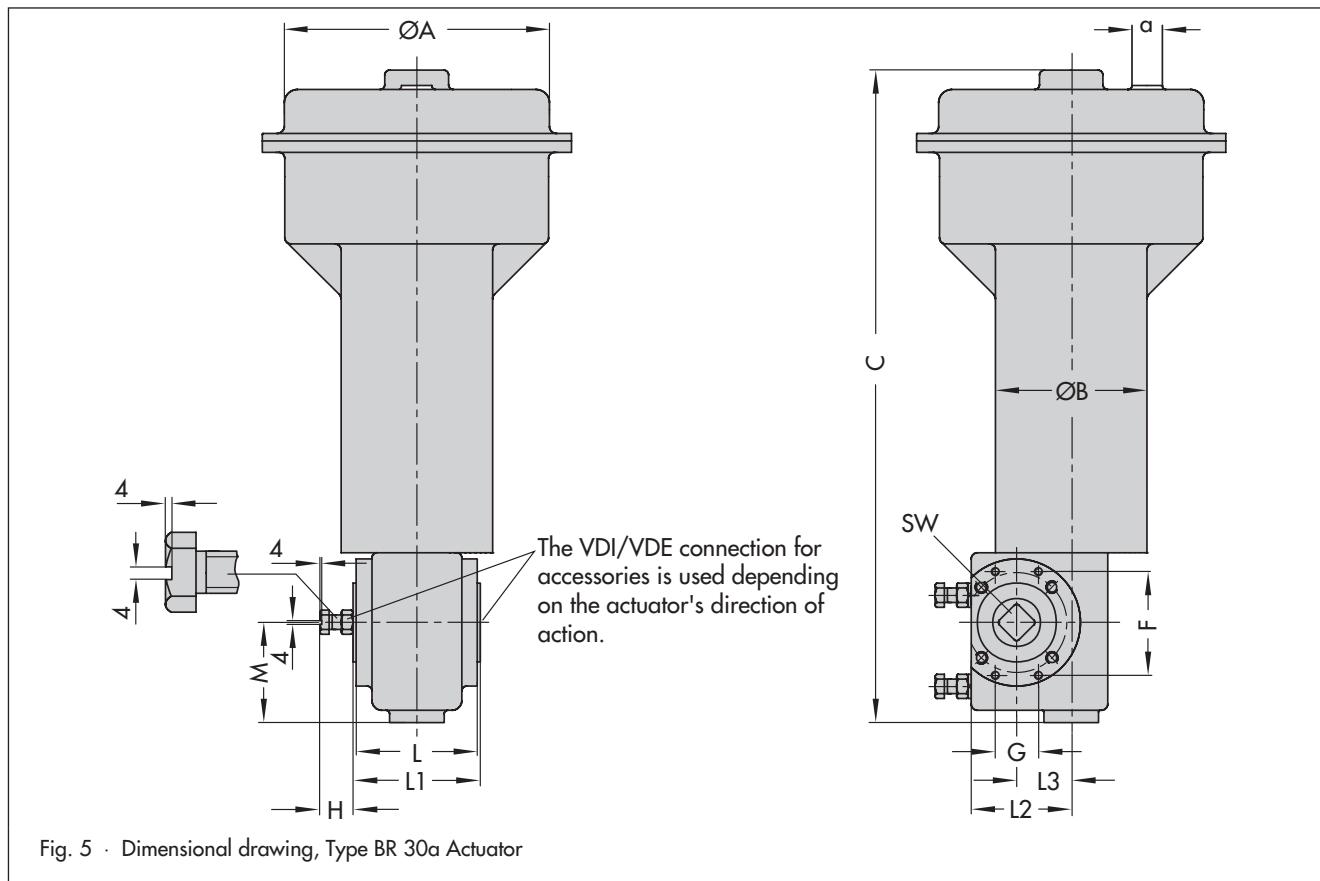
· Dimensional drawing, Type BR 30a Actuator
